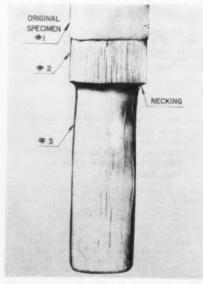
This illustration shows the results of chemical machining on a 6-inch specimen.
